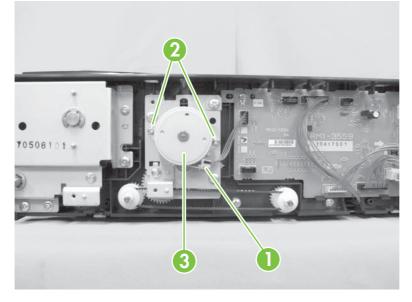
Remove the finisher lock-assembly (4 of 4)
